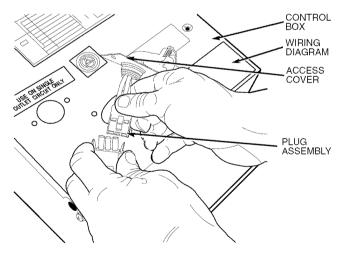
DISCONNECTING PLUG ASSEMBLY ON HARDWIRED UNITS
